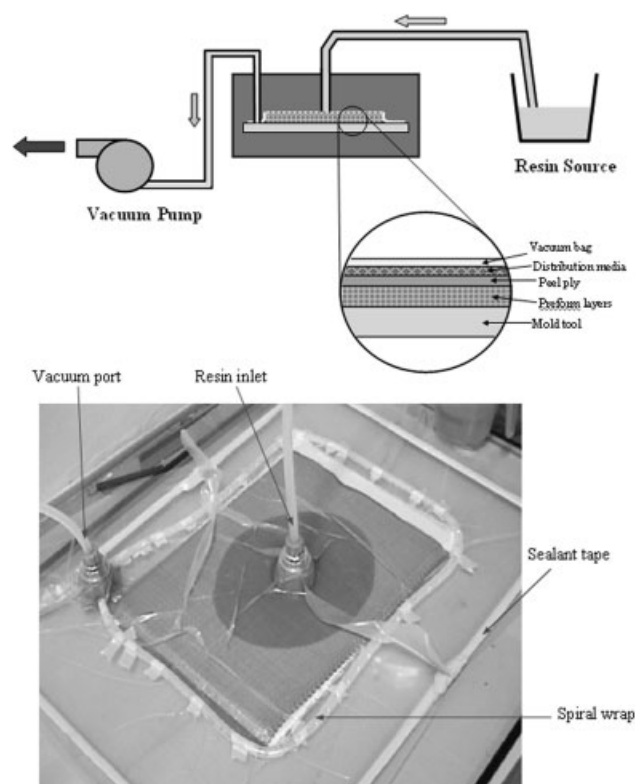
Vacuum-assisted resin transfer molding process and fabrication setup.
